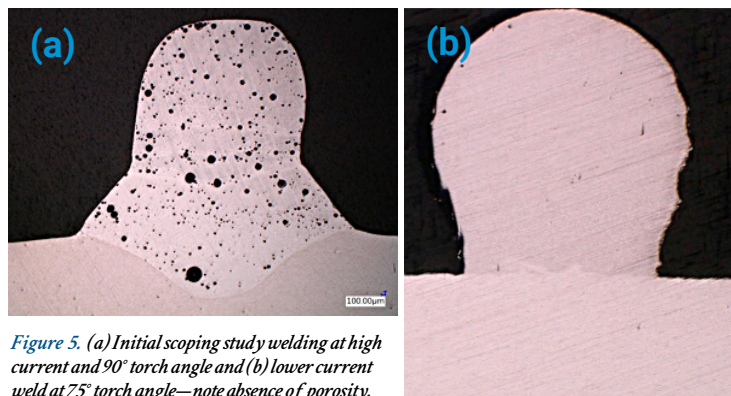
(a) Initial scoping study welding at high current and 90° torch angle and (b) lower current weld at 75° torch angle—note absence of porosity.
